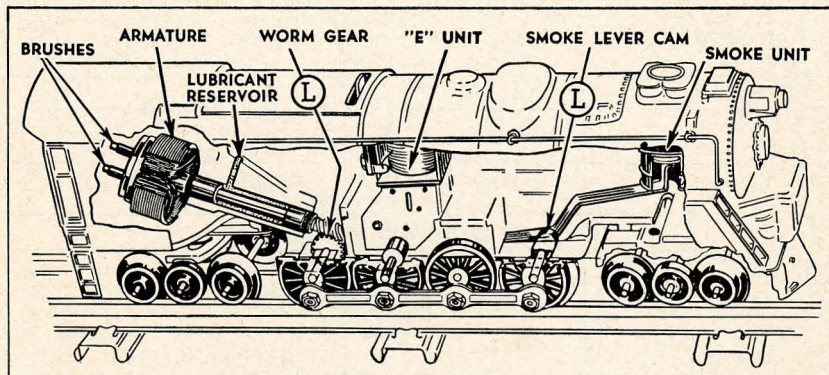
Cutaway View of No. 671 Locomotive Showing Working Parts. Parts Marked "L" Should Be Lubricated Occasionally
